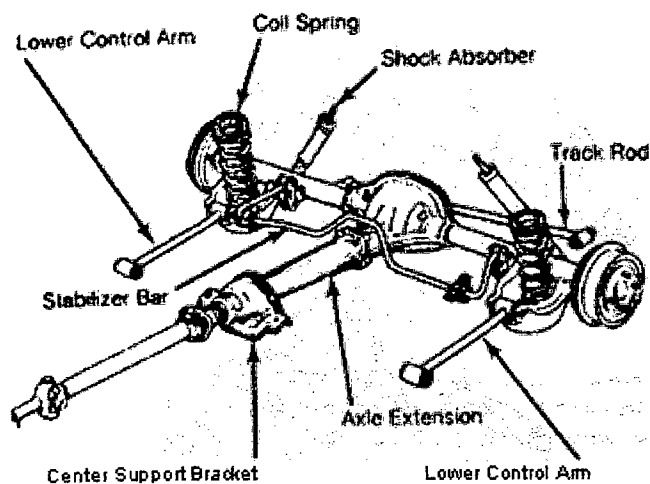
shows the center support bracket and the axle extension prevents axle rotation from acceleration or brake torque response. The driveshaft and axle extension are a type of torque tube driveshaft. (Birch 1999)
